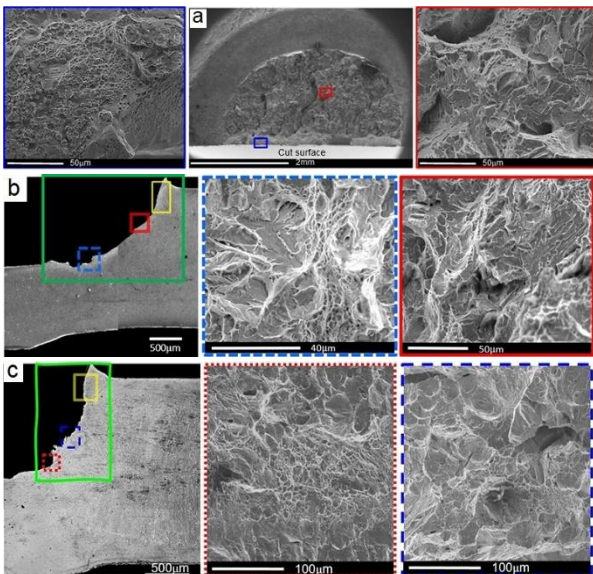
Fracture surface of CP samples showing domination of (a) quasi-cleavage failure in CP-L, (b) quasi-cleavage and shear failure in CP-M and (c) ductile and shear failure in CP-H samples.
